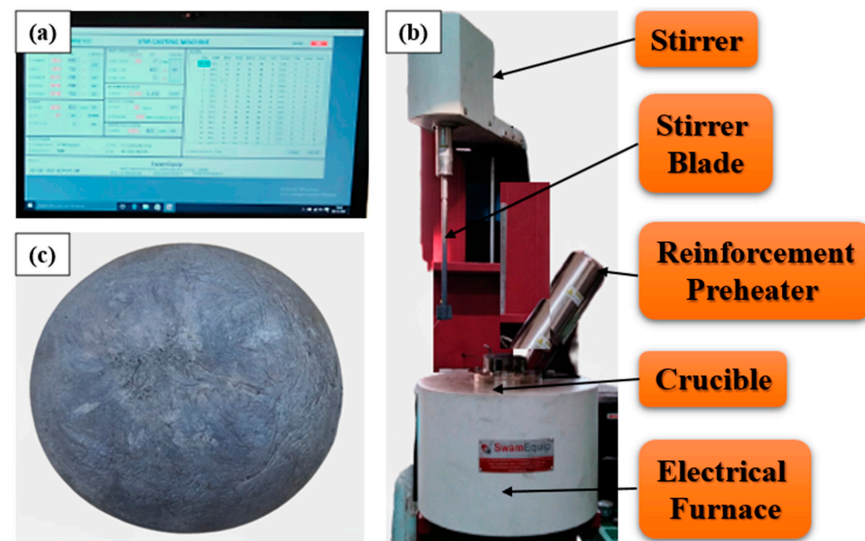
Schematic representation of the experimental arrangement for the stir casting process: (a) control section, (b) stir casting machine, and (c) prepared sample.
